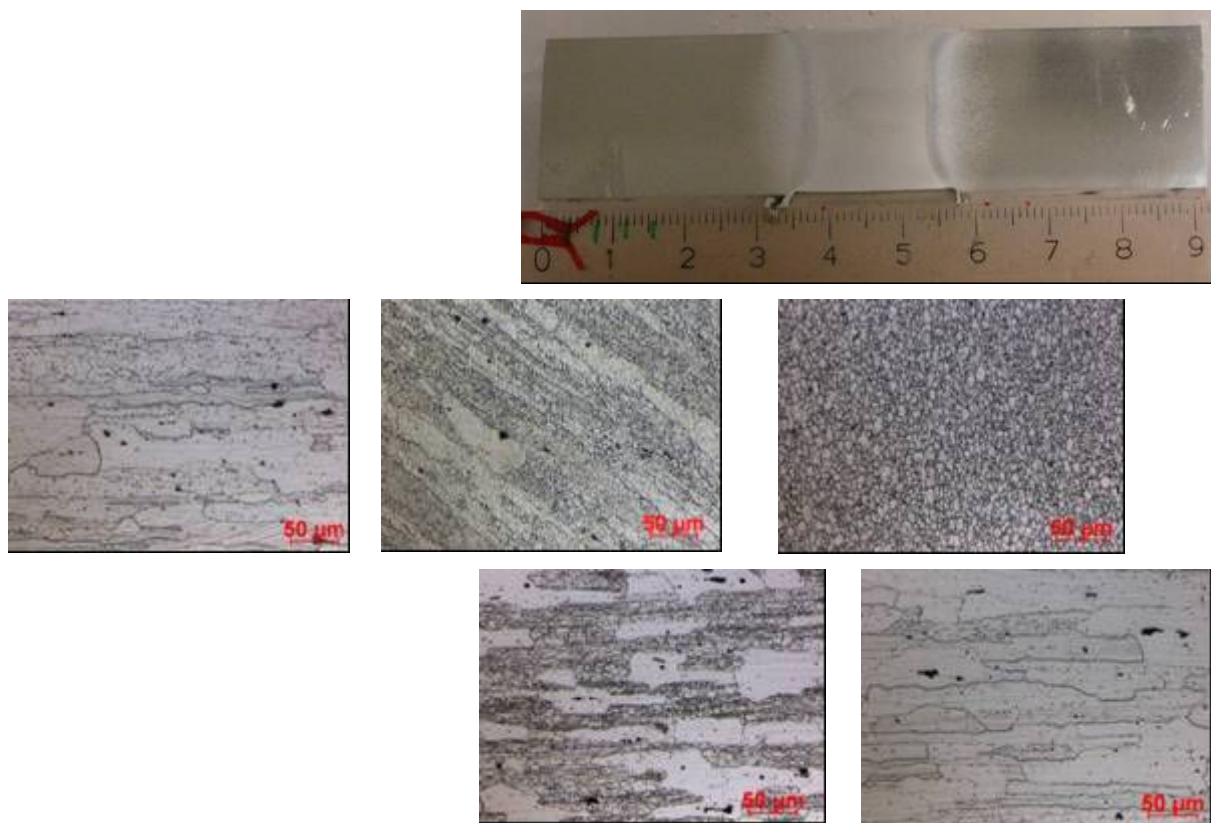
Typical cross section for 7449 bobbin tool FSW 23mm thick plate
